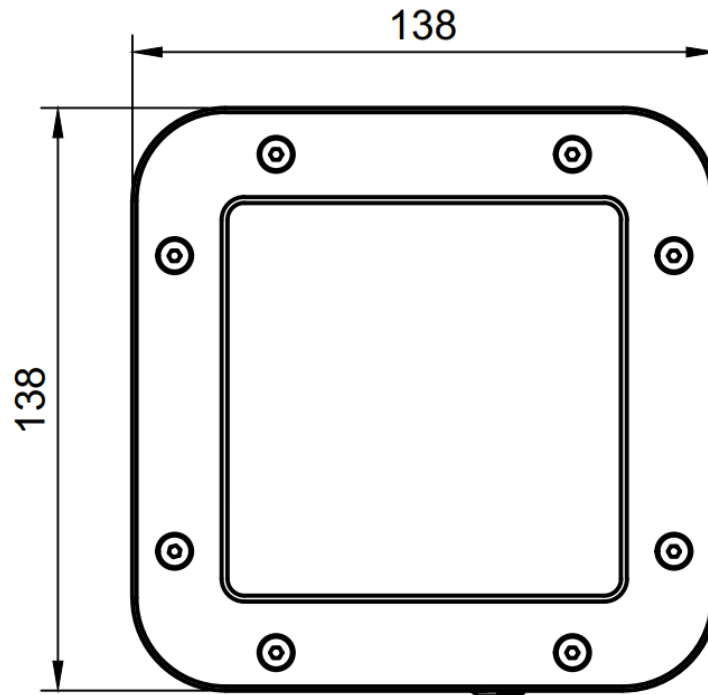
KY-LOC 1D.02.01 Mechanical Drawing (Front View)
